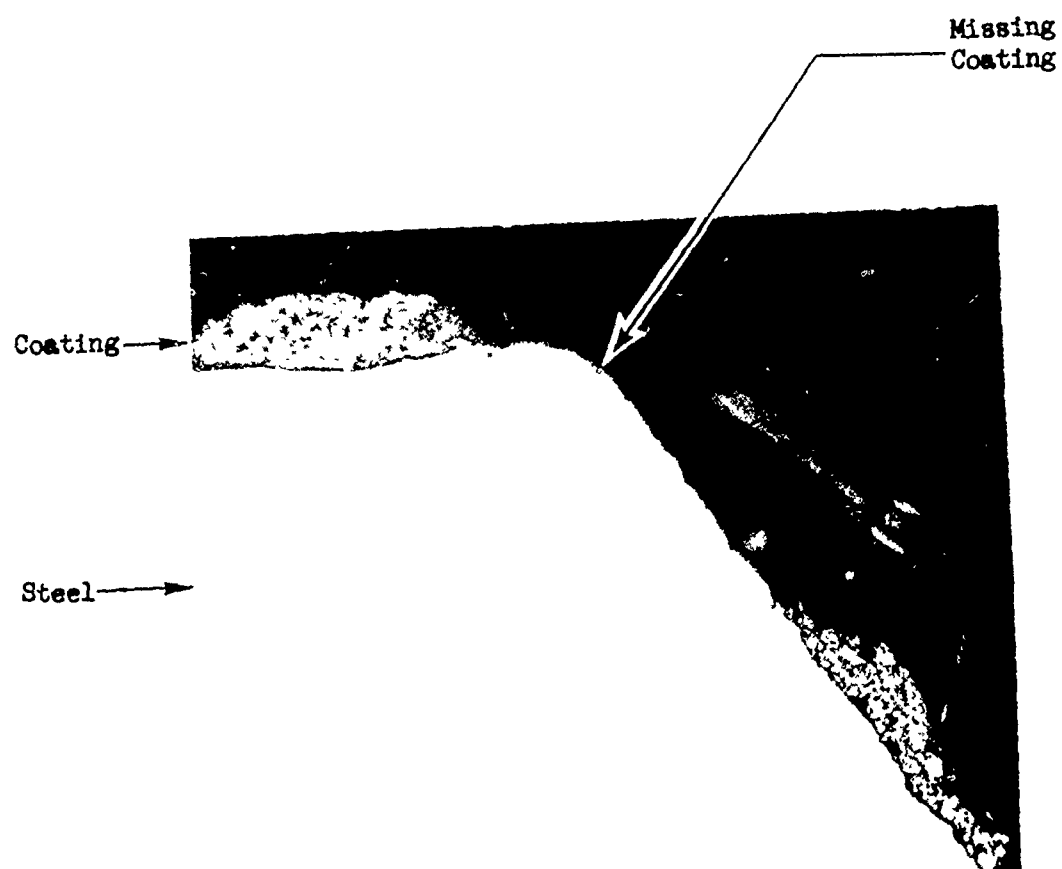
BOLT'S THREAD, MAJOR DIAMETER COATED WITH SERMETEL W,
